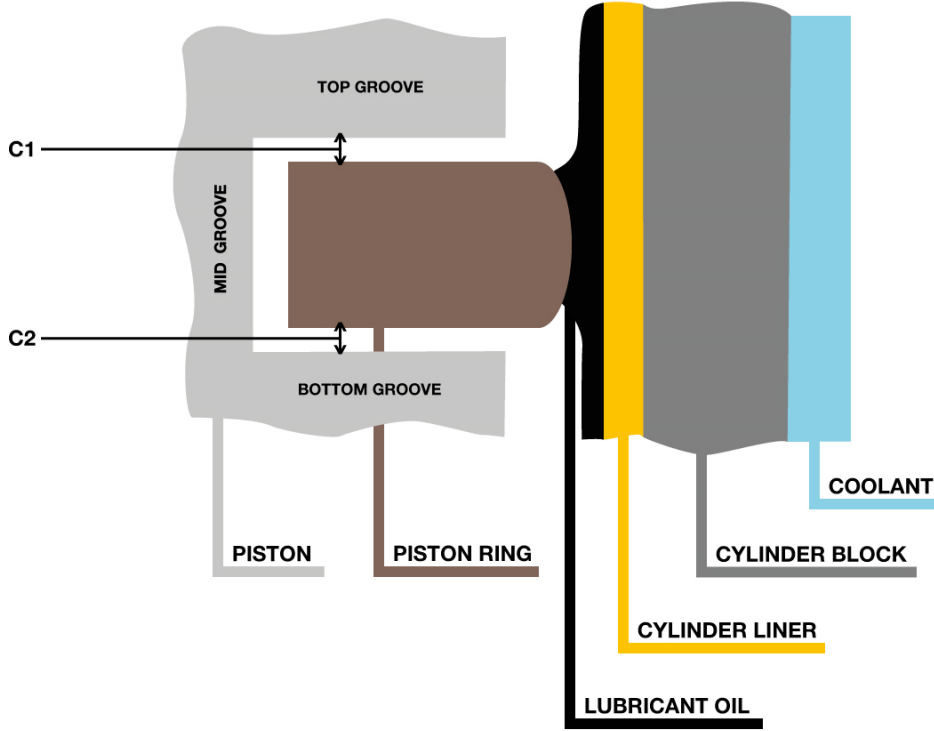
Illustration of piston ring Assembly and cylinder liner.
